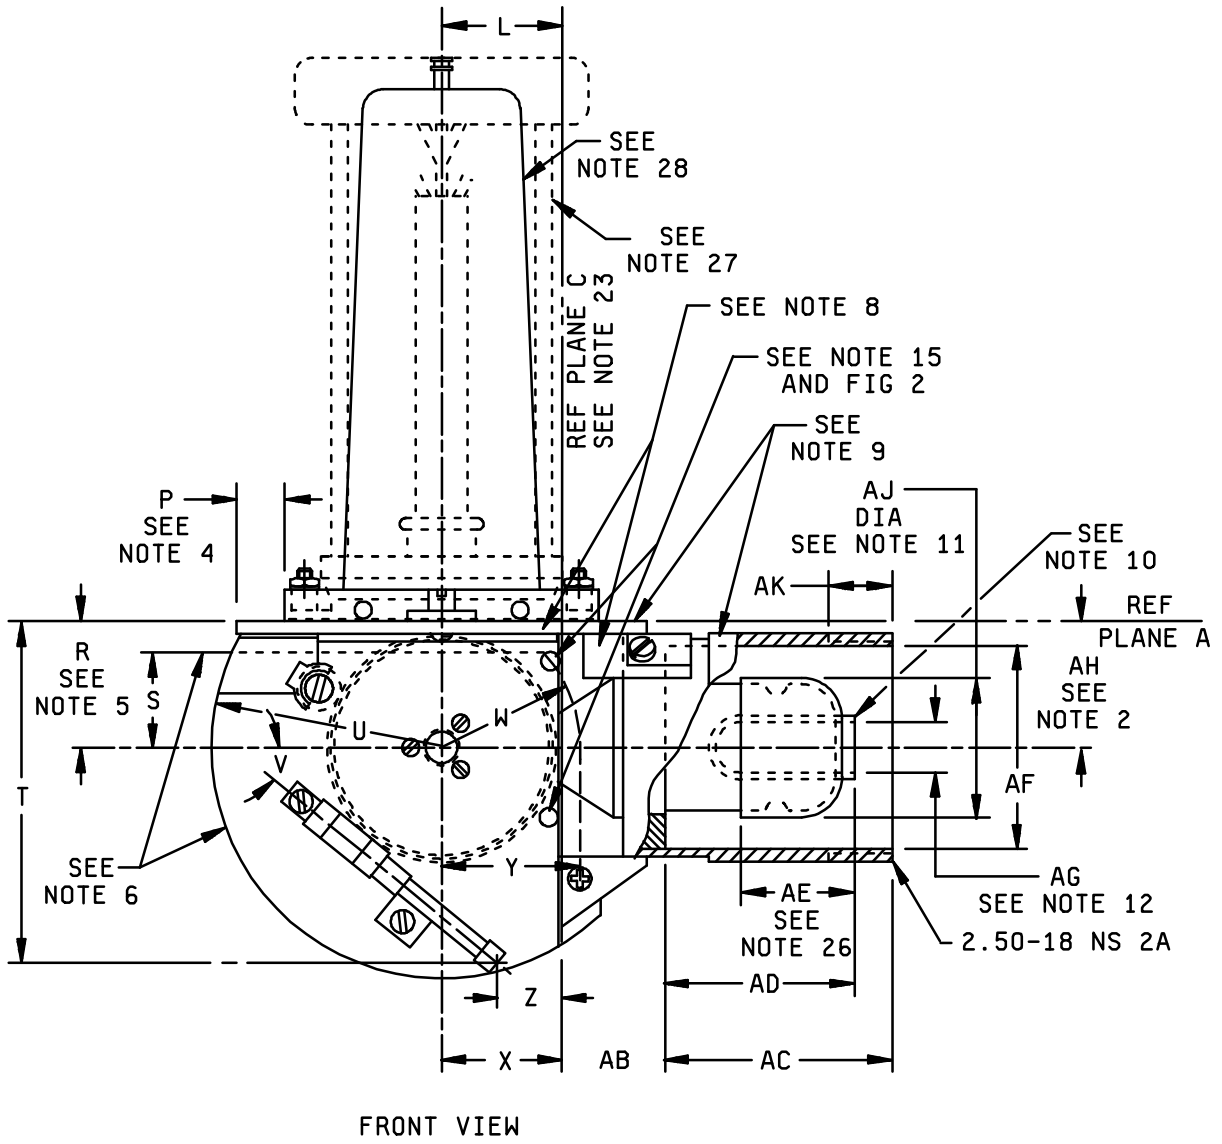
Outline drawing of electron tube types 5586 and 5657.
